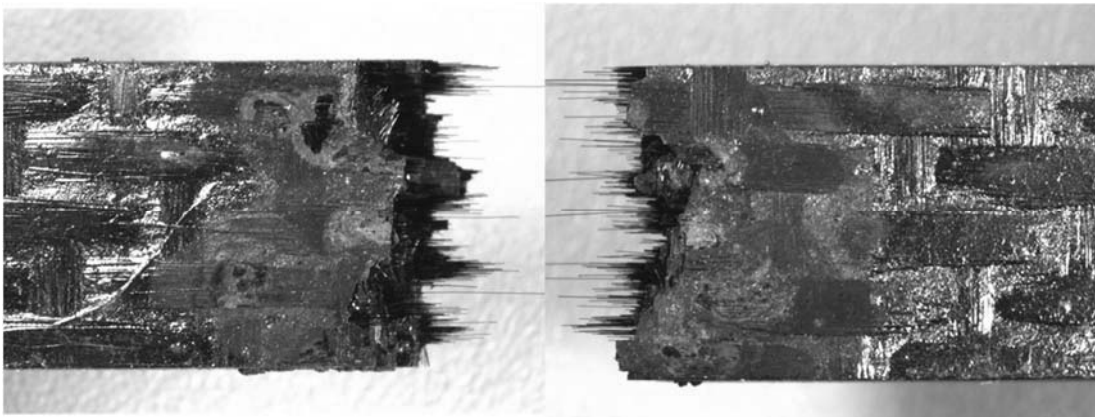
Failure initiated where thermocouples beads contacted the calibrator specimen.
